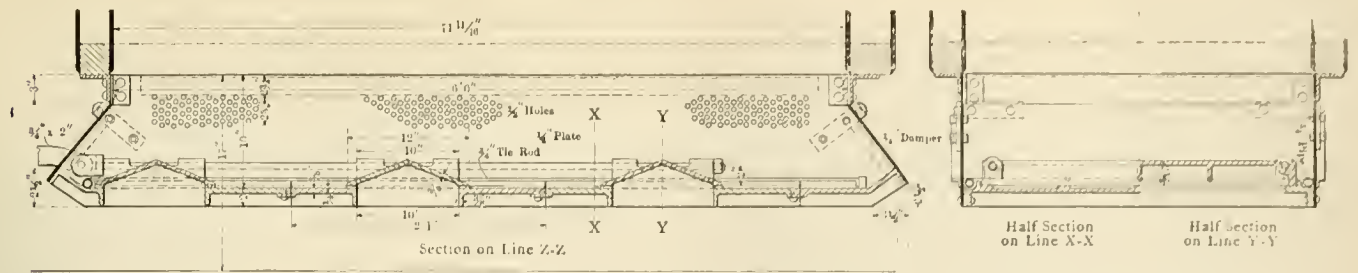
SHALLOW ASH PAN WITH SLIDING DOORS—ILLINOIS CENTRAL RAILROAD.
